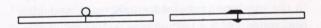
Improperly designed joint causes excess of molten brazing alloy to remain on surface, requiring finishing operations. Properly designed joints have fillets which eliminate this trouble.
